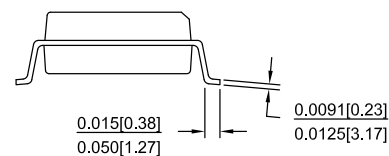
28-Pin (300-Mil) Molded SOIC
